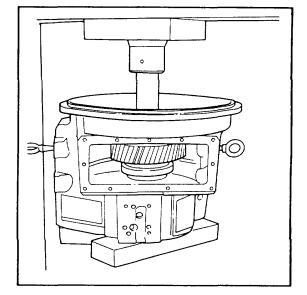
Pressure output shaft from rear bearing inner race and gear.
